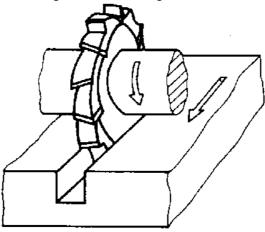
Grooving cutter (with straight teeth, relieved by turning)
